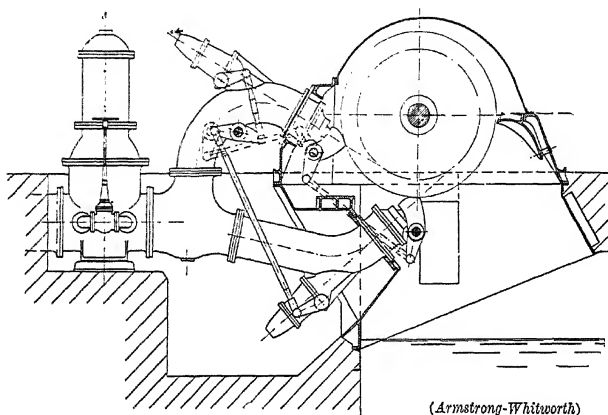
ARRANGEMENT OF PELTON WHEEL
